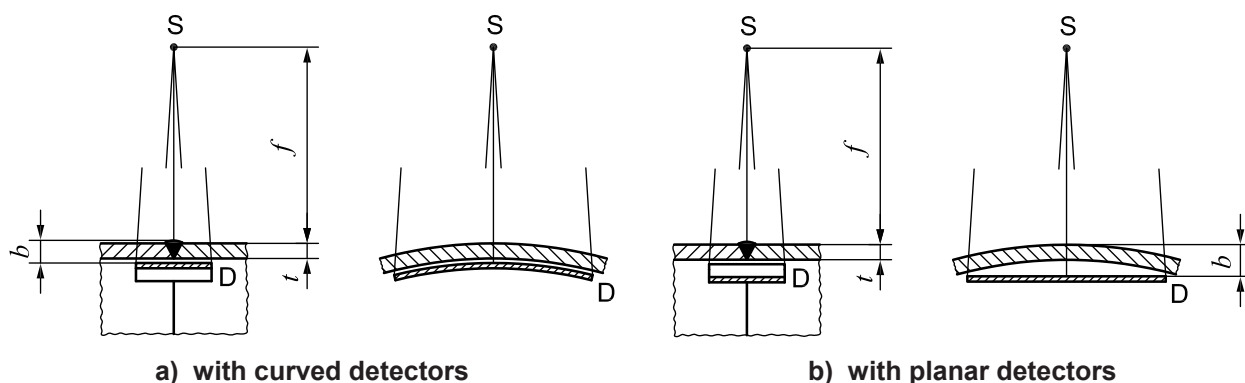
Test arrangement for plane welds and single wall penetration
